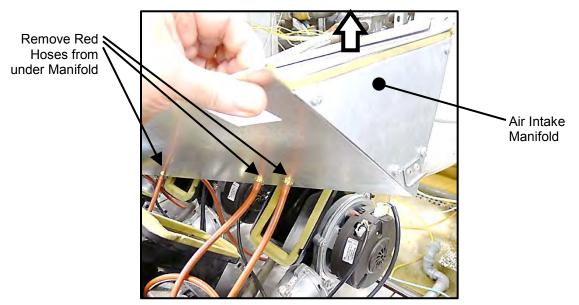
Removing Red Hoses and Manifold from Unit (Step 6)
